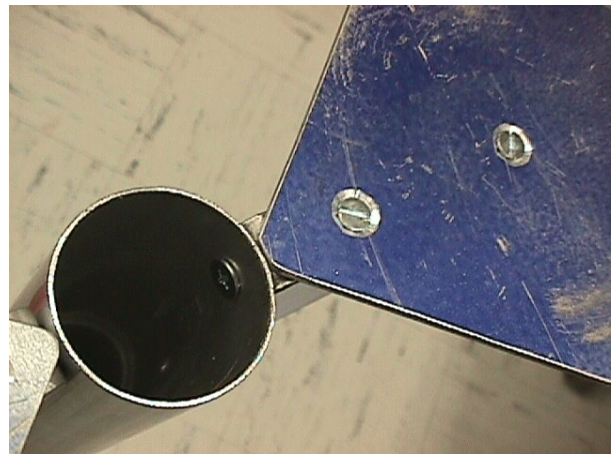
Detail showing the head of one of the wafer top screws that fasten the bottom tab of one foot to the aluminum tube. The wafer top fits into the oversize (0.8-cm) hole so that it does not prevent the access tube from fitting inside the stand. Use two screws, one above the other, to provide a rigid joint.
